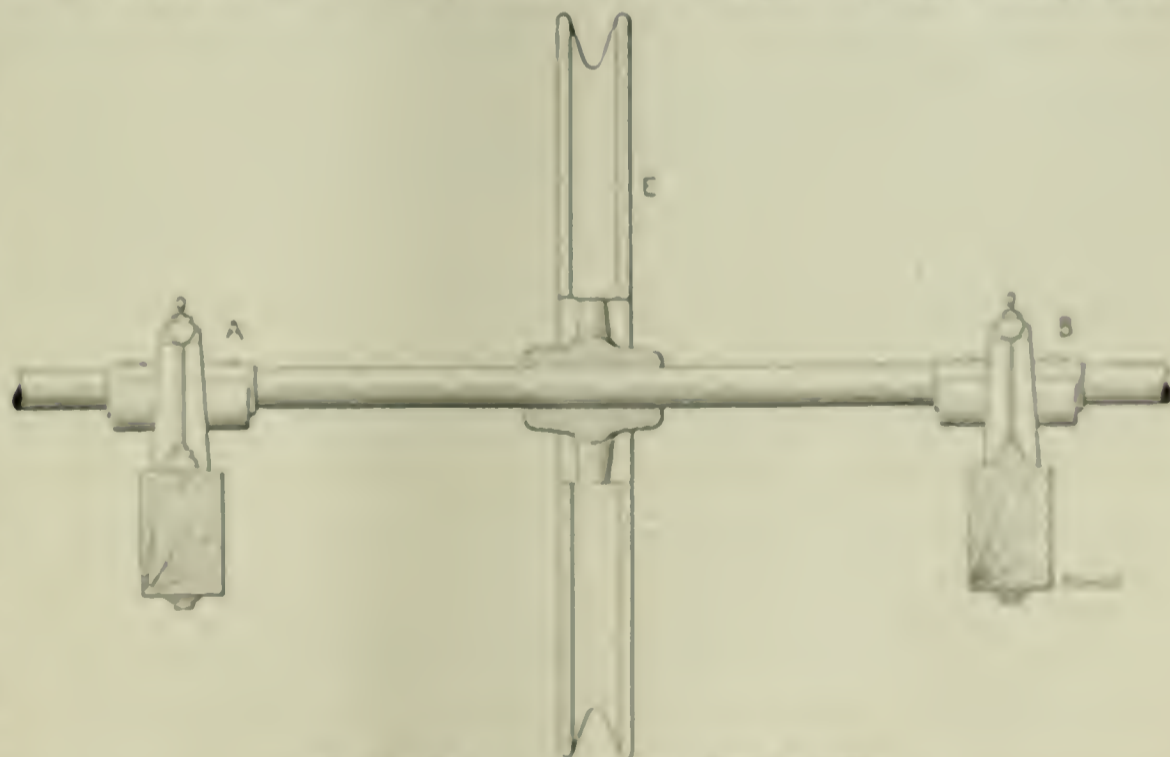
BEARINGS TOO FAR FROM WHEEL.
